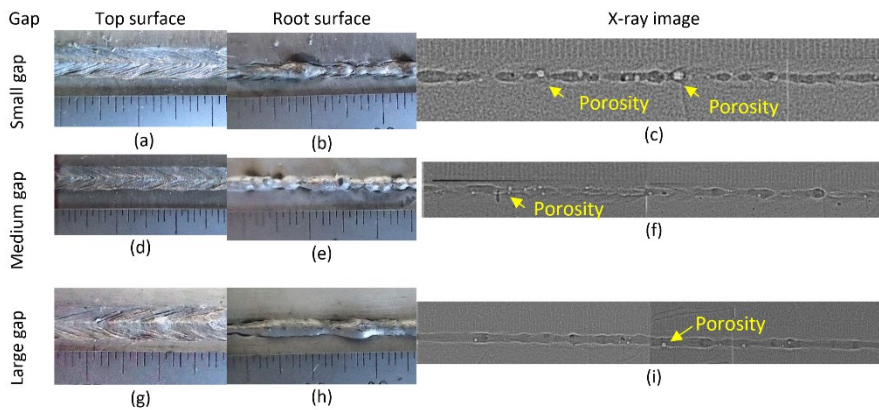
(a,b,d,e,g,h) Weld beads surface appearances; (c,f,i) corresponding X-ray images
